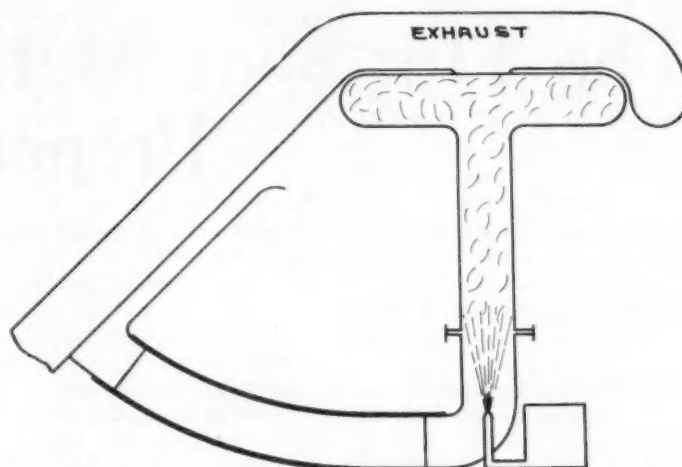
MANIFOLD CONSTRUCTION TO SUPPLY HEAT TO THE AIR CHARGE BEFORE IT ENTERS THE CARBURETER
